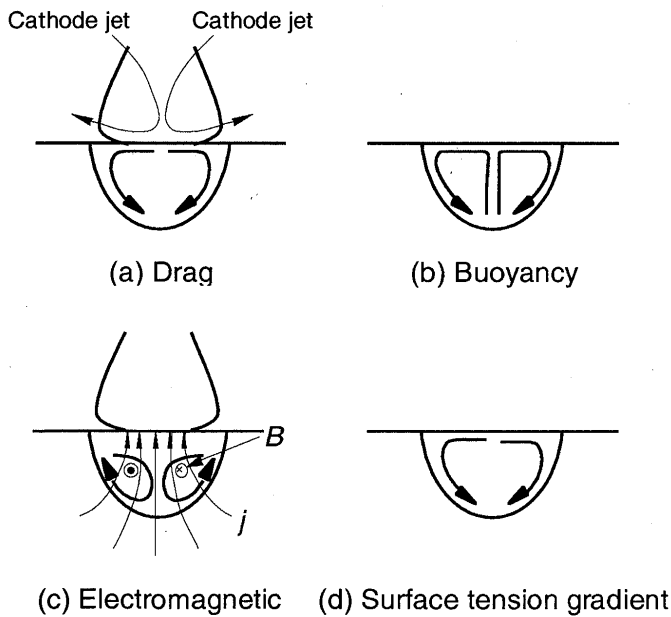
Flow directions induced by four possible driving forces in the weld pool by GTA welding process.
